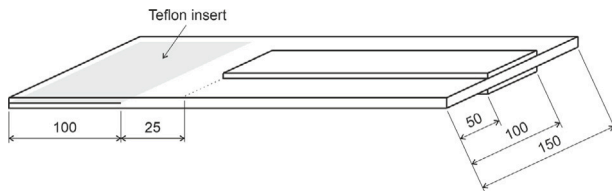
Arrangement of the partially reinforced DCB specimen (units in mm).
